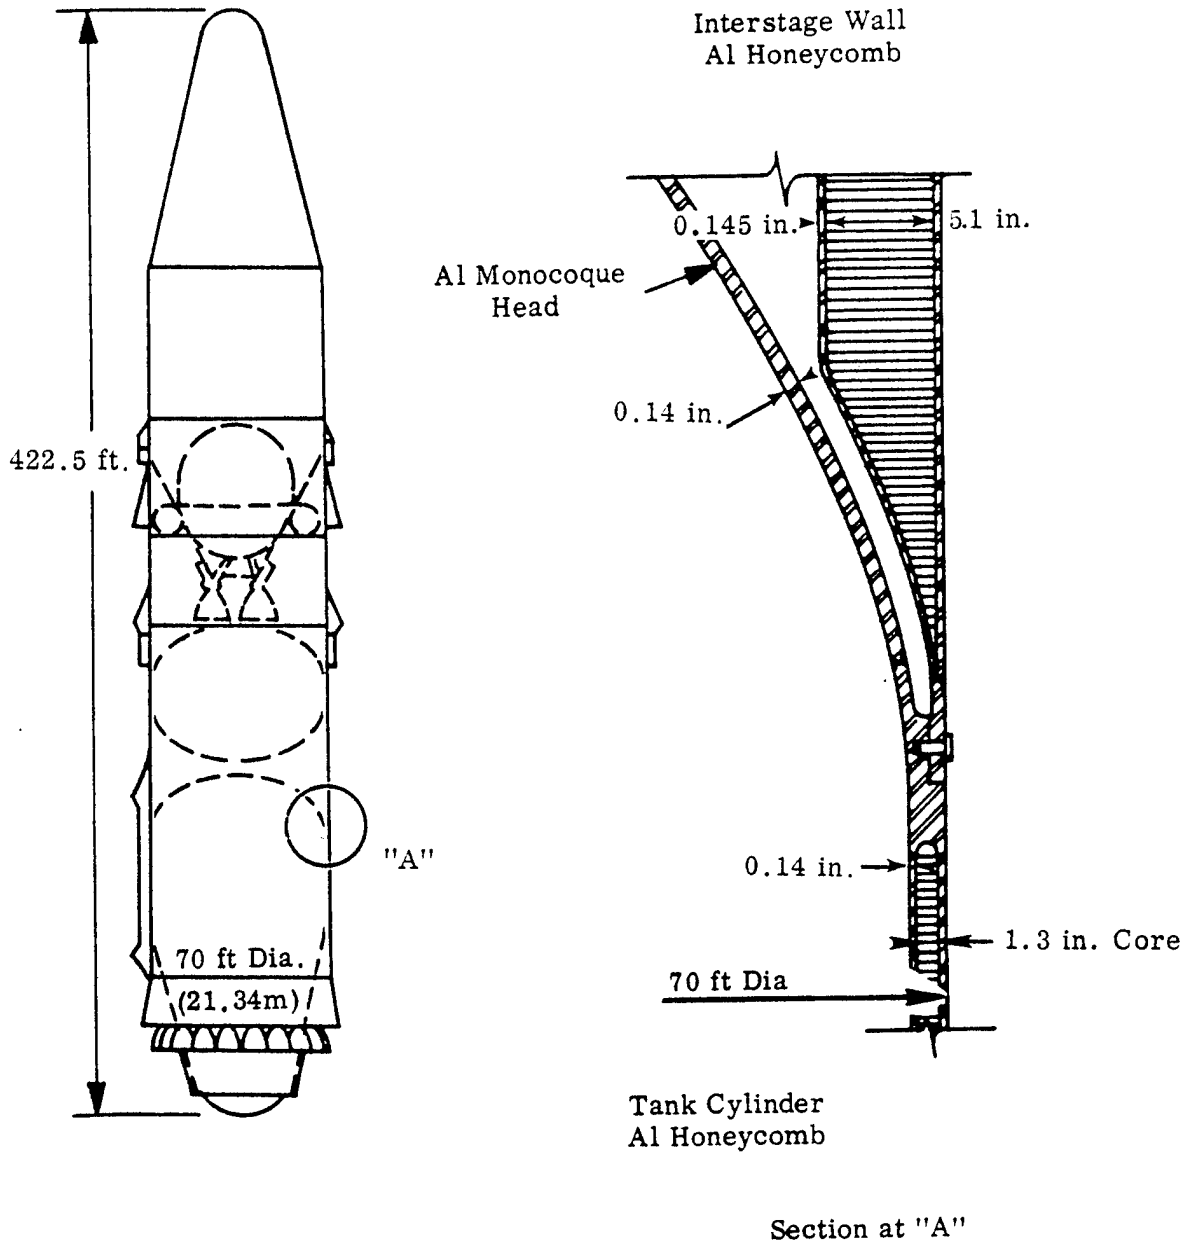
Typical Dimensions of Aluminum Honeycomb Components^(1,2)
